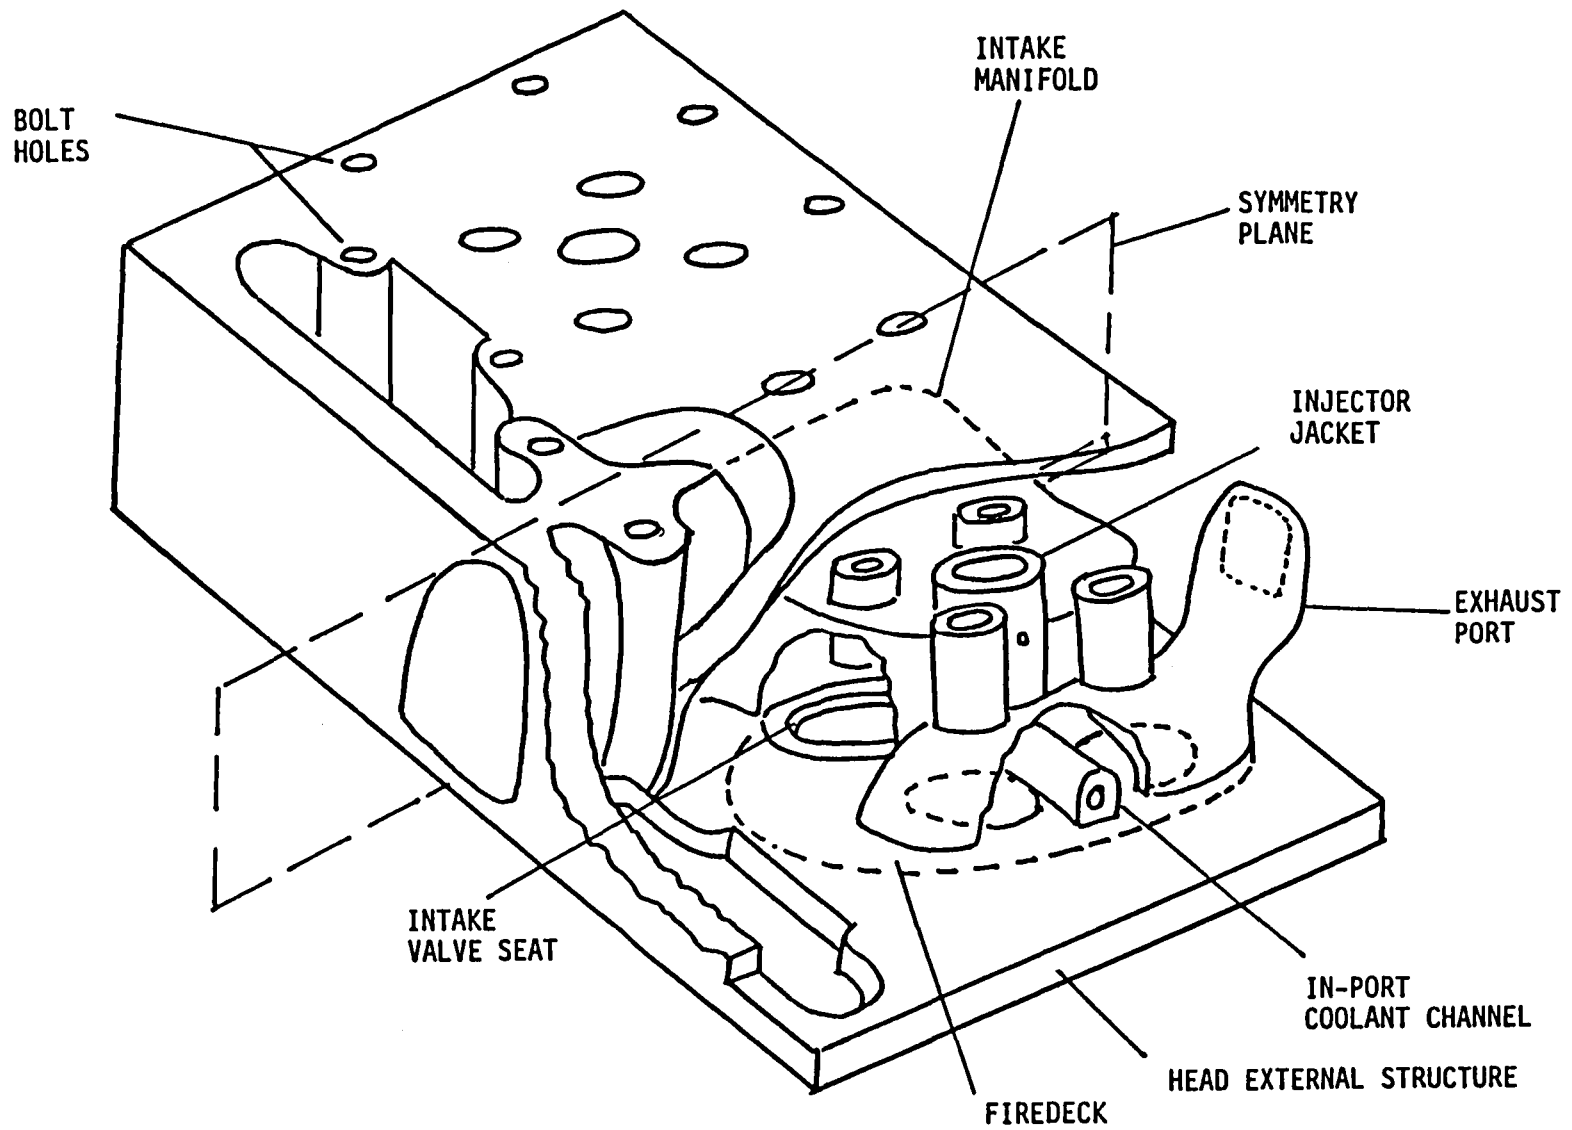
Schematic diagram of Cummins engine head. A cutout view of the symmetric one-half of the structure shows major internal elements above one cylinder.
